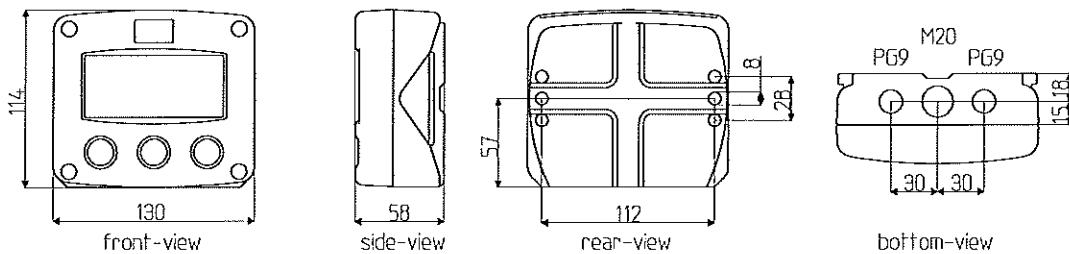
Dimensions of type HA - IP67 Aluminum Field enclosure with 2xPG9 and 1xM20 drilling.
